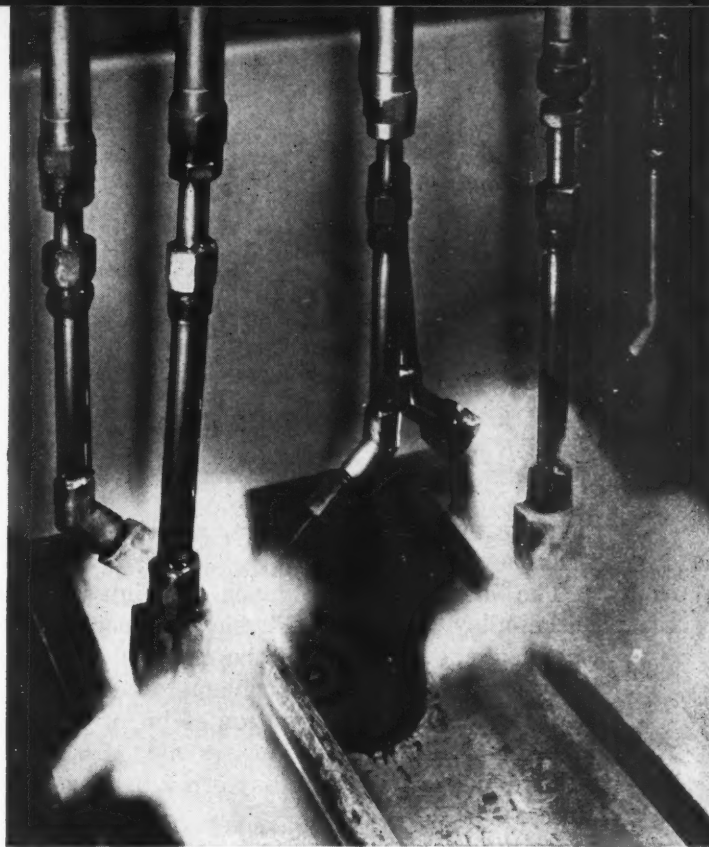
Flame-hardening a lathe bed with six torches operating simultaneously
